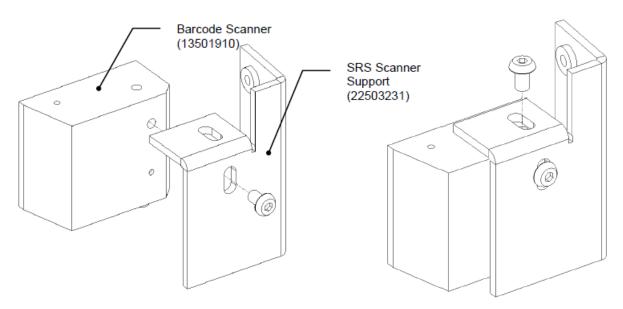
The Barcode Scanner Assembly and the Sample Rack Scanner Support
